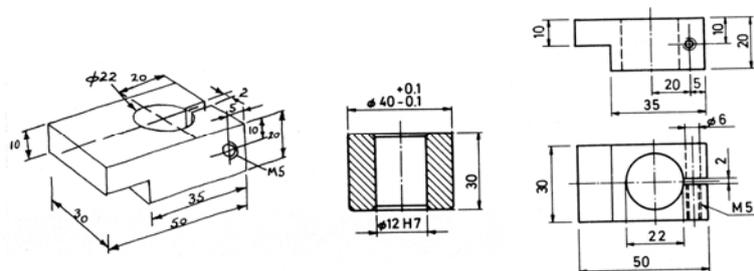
Modelling dimensions and tolerances (Tjalve *et al.* 1979b)
